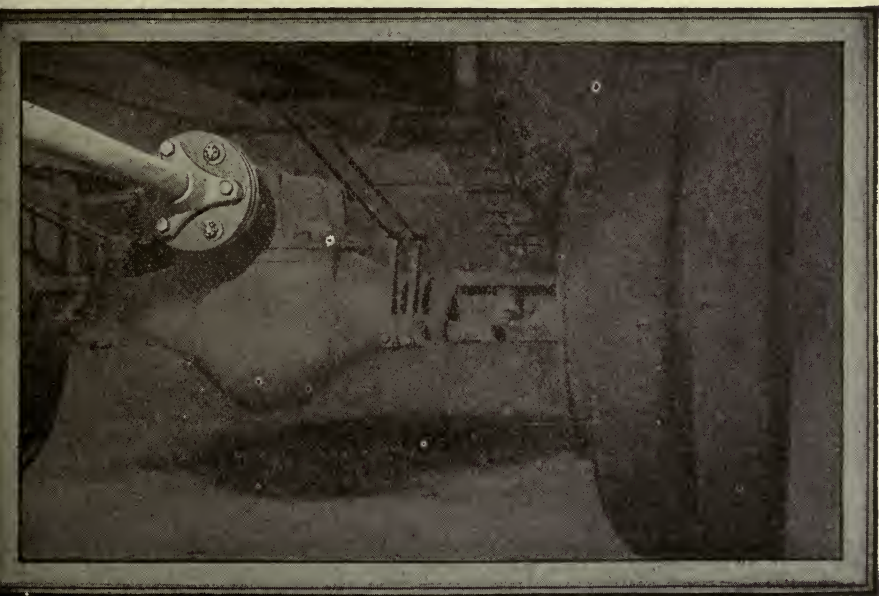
Thermoid Hardy Universal applied to the rear end of propeller shaft for a truck.
